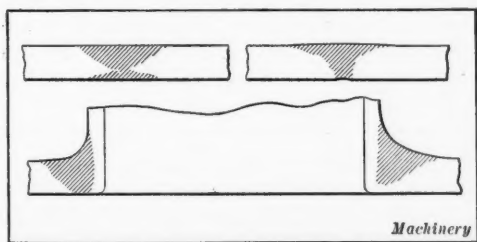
Welds made with Wide Angle between Surfaces
